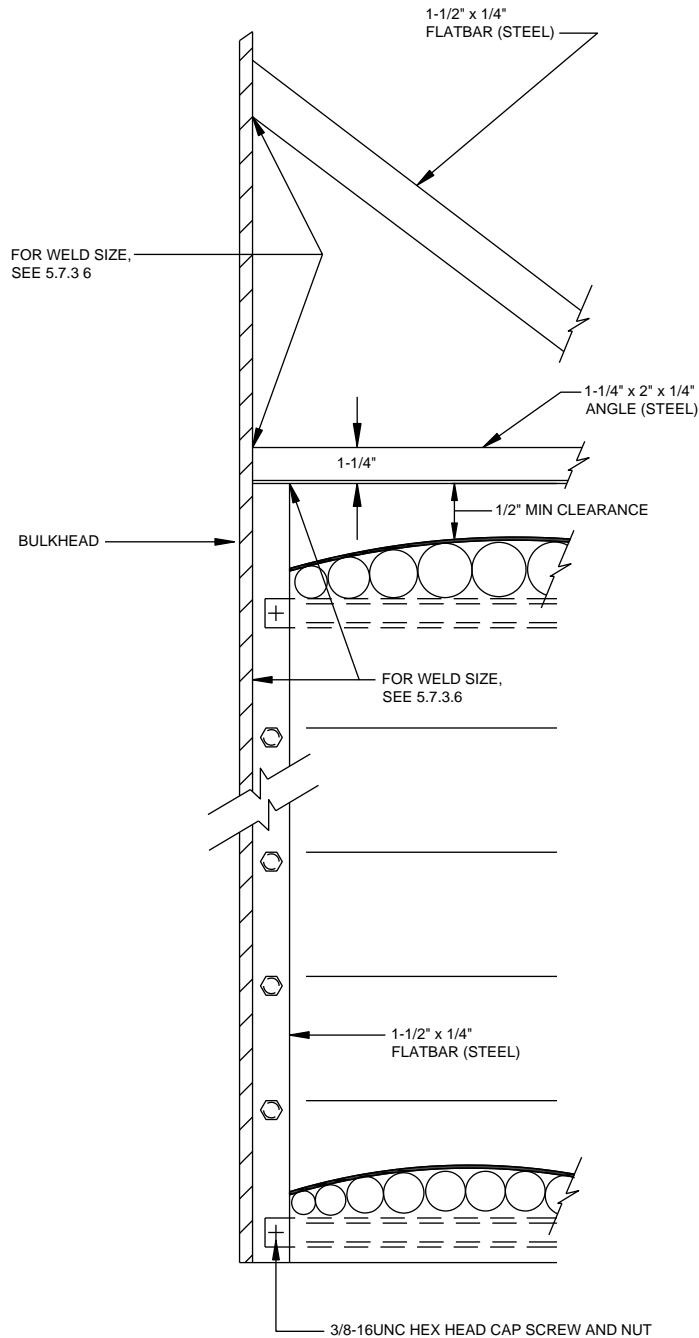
B28. Multiple cables on steel bulkheads – cables supported on stiffener (surface ships).
